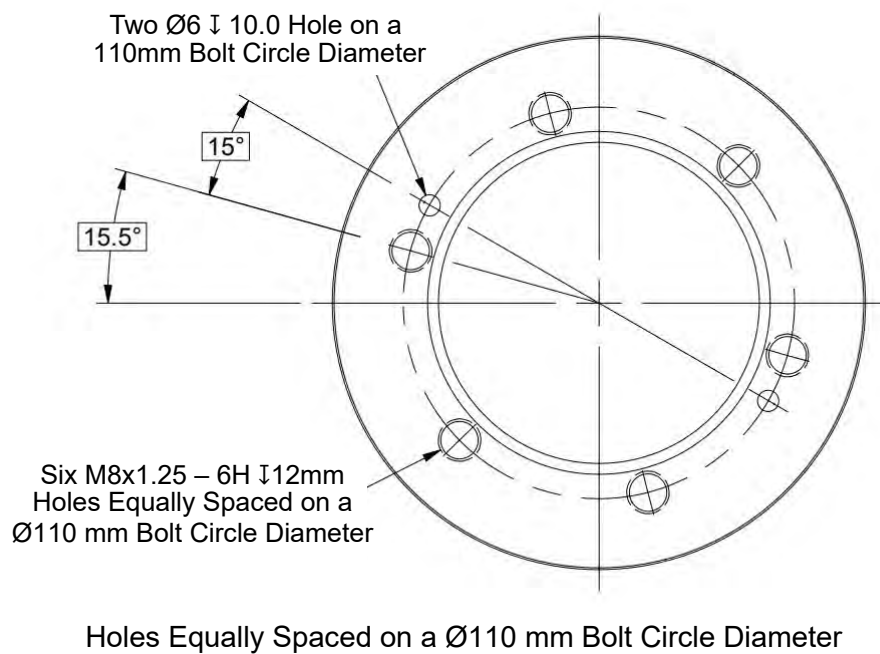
Mounting Hole Pattern (4-M P/N: 7121110001 Shown)
